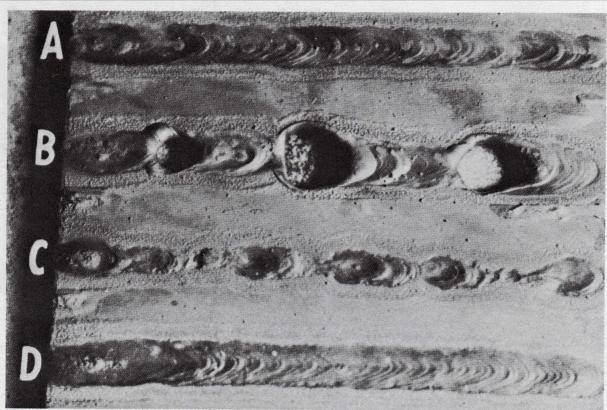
Samples of weld bead defects. (A) This is a fairly satisfactory weld bead. The ripple of the bead could be more uniform. (B) This poor bead may be caused by too slow a speed of travel or by a torch tip too large for the particular thickness of material being used. (C) This defect is generally caused by moving too rapidly and not allowing a proper weld bead to form. (D) This is a satisfactory weld except for the burned section at the end. This defect is caused by not moving the weld bead fast enough as the weld is being completed.
